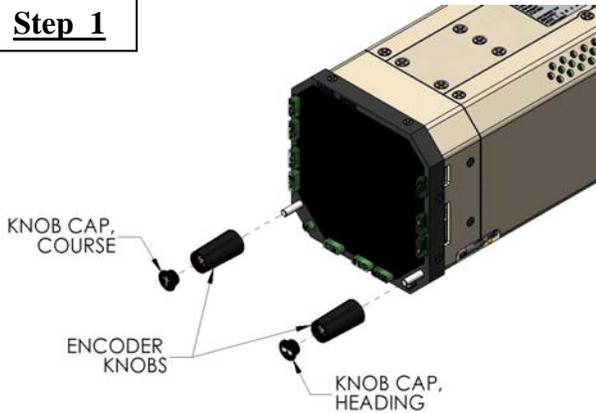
Place SN3500 unit onto a grounded bench area. Carefully pry heading and course knob caps from encoder knobs using a small, flat blade screw driver or similar. Loosen encoder knob collets using a flat blade screw driver and remove encoder knobs from encoder shafts.
